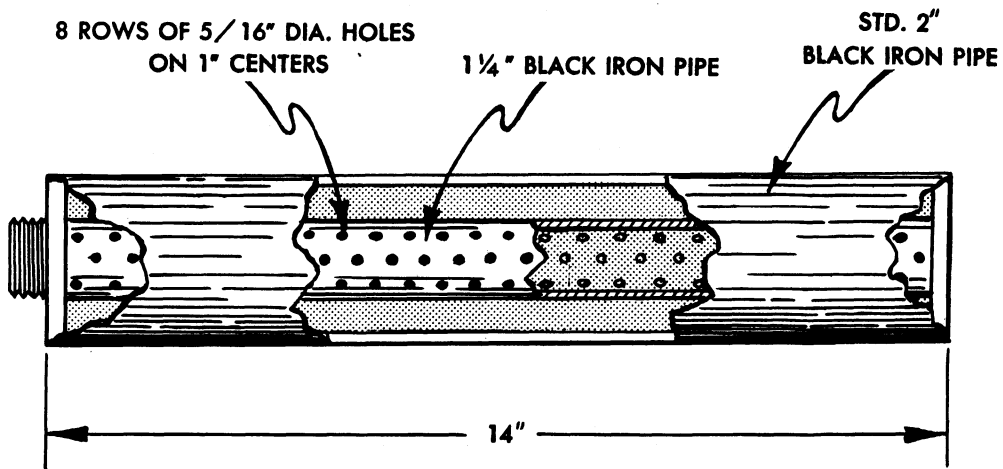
PERFORATED TAIL-PIPE WITH JACKET USED WITH CHOKED INLET BURNER
